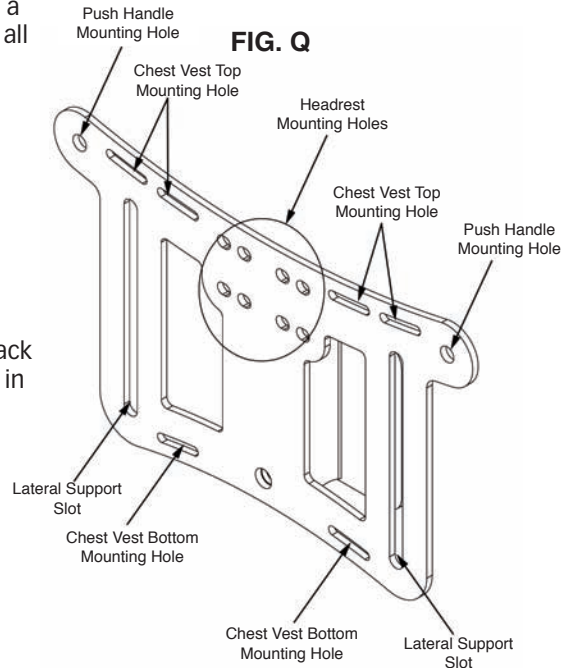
FIG. Q-The accessories mounting bracket is attached to the back of your unit and is used for a wide range of options. The holes in the middle can be used for many styles of aftermarket head supports. There are holes for the optional push handles, chest vests, chest straps, and lateral supports. This bracket is standard on all units.
